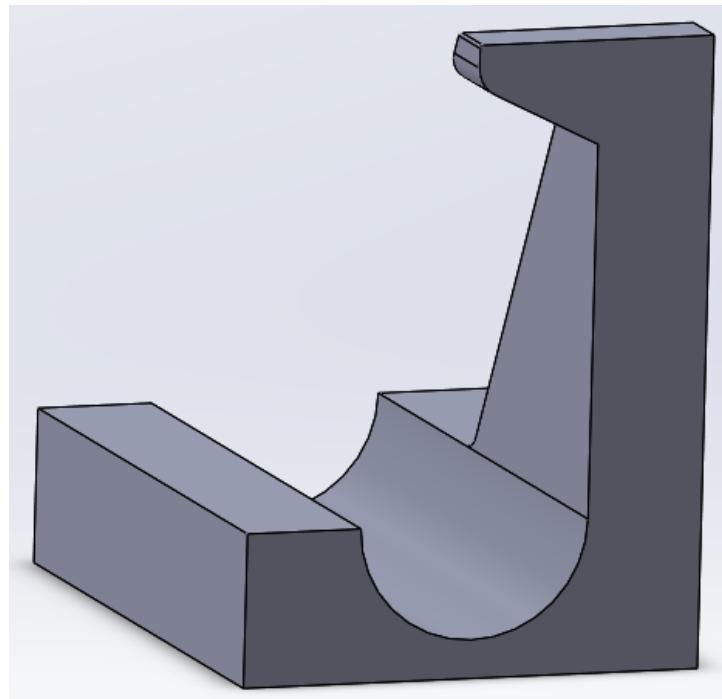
CAD model of stopper design used to rotate and shut off input valve
